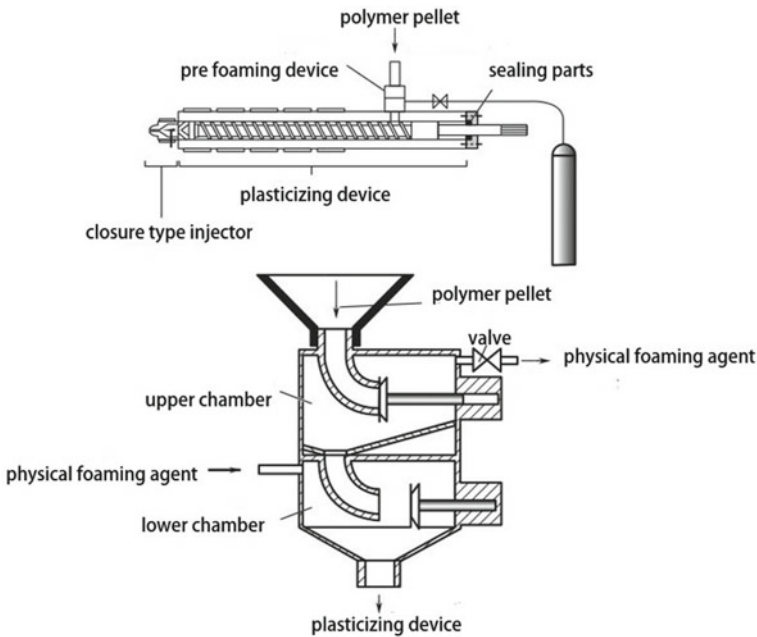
Fundamentals of Arburg Physical Foaming Injection molding
